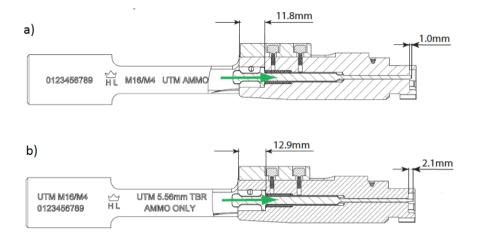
(a) UTM MMR breech bolt; (b) UTM TBR breech bolt [11]
